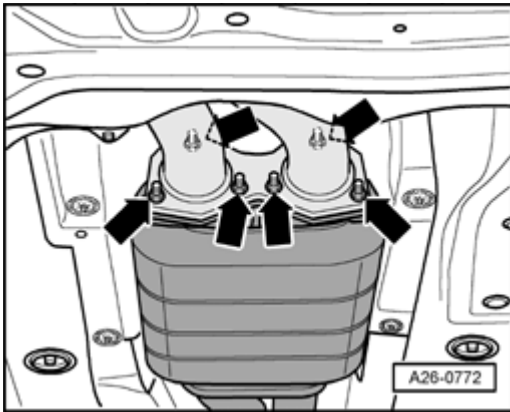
Unbolting Catalytic Converter From Front Exhaust Pipe
